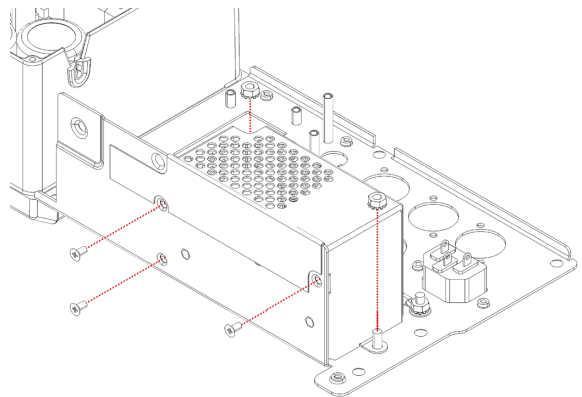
EMI shield assembly in amplifier chassis
